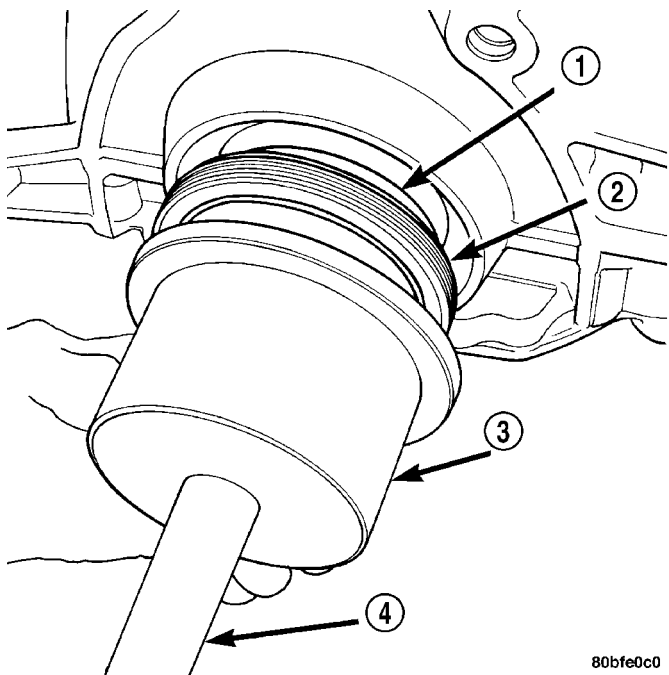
Crankshaft Seal and Special Tools 6926-2 & C-4171
